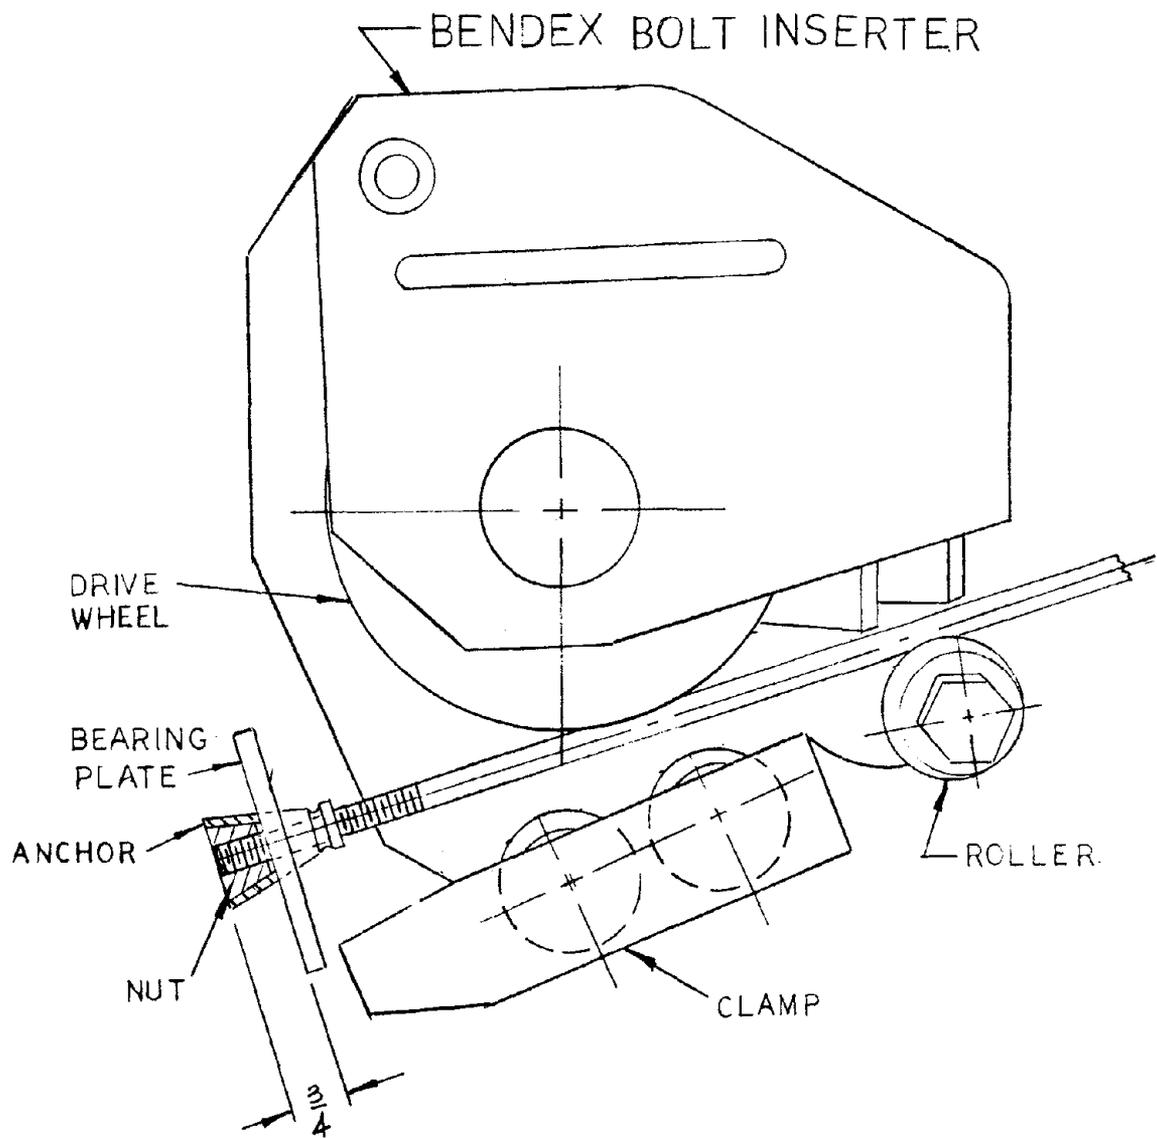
Bendix Bolt Inserter Loading Method No. 1
